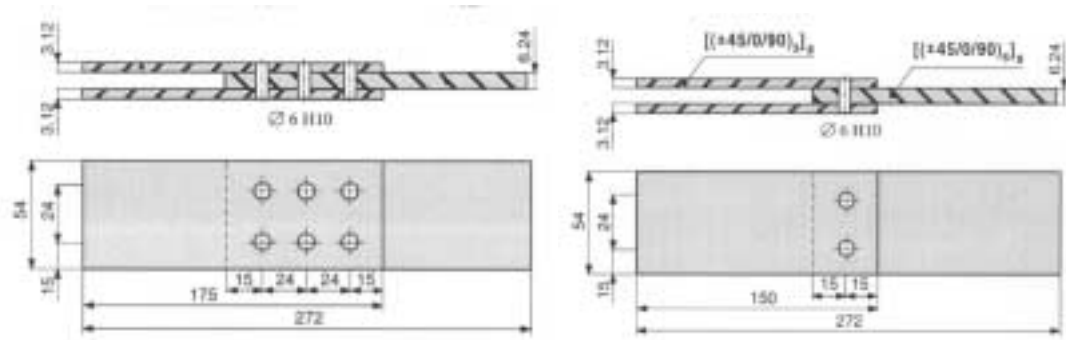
Schematic of bolted joints. a: Bolted joint with six protruding head fasteners, 6 mm and 4 mm. Some joints with thinner composite plates, 2.08 mm outer plates and 4.16 mm central plate. First bolt row to the right and third bolt row to the left. b: Joint with two fasteners.
